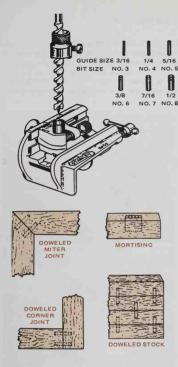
A doweling jig and doweled joints. (Stanley Tools)
